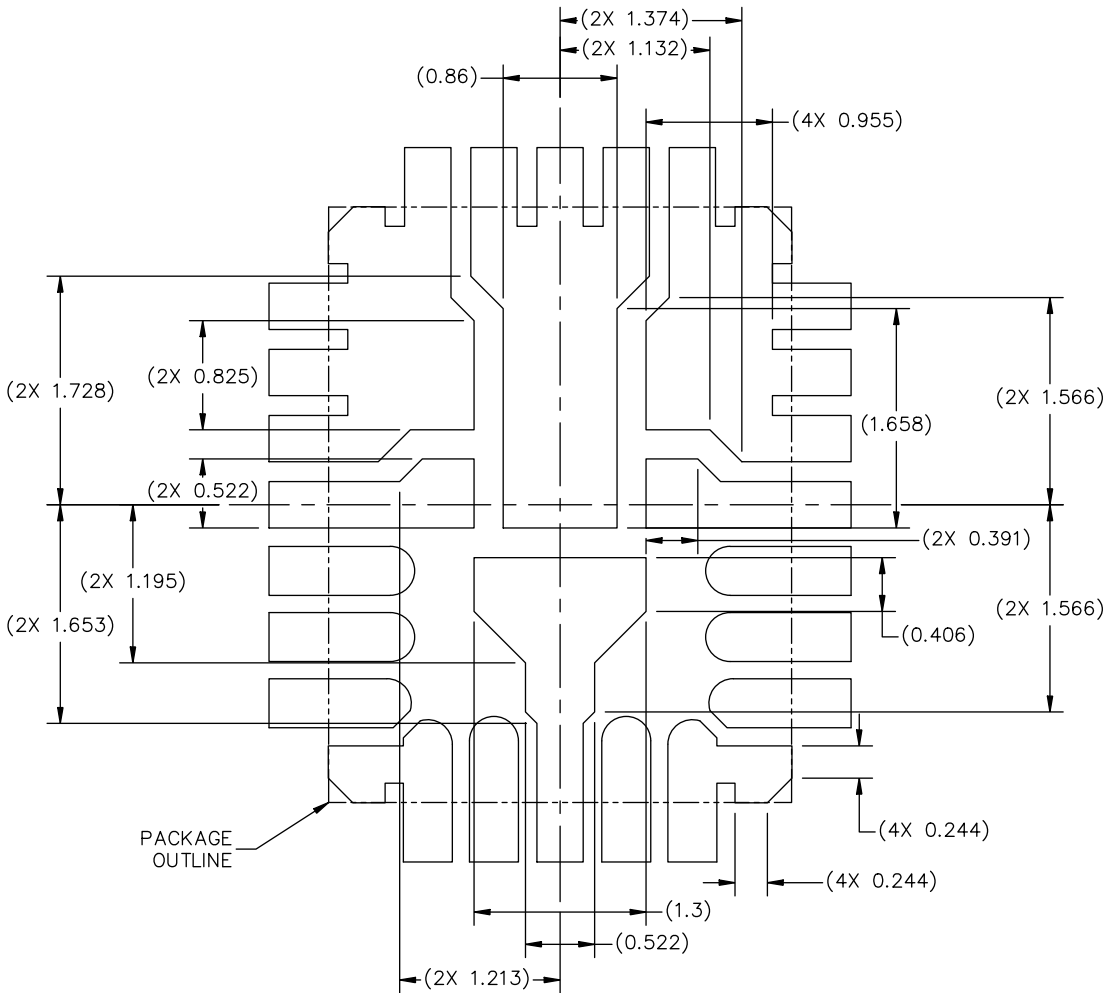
Reflow soldering footprint part1 for HVQFN24 (SOT2090-1(SC))
